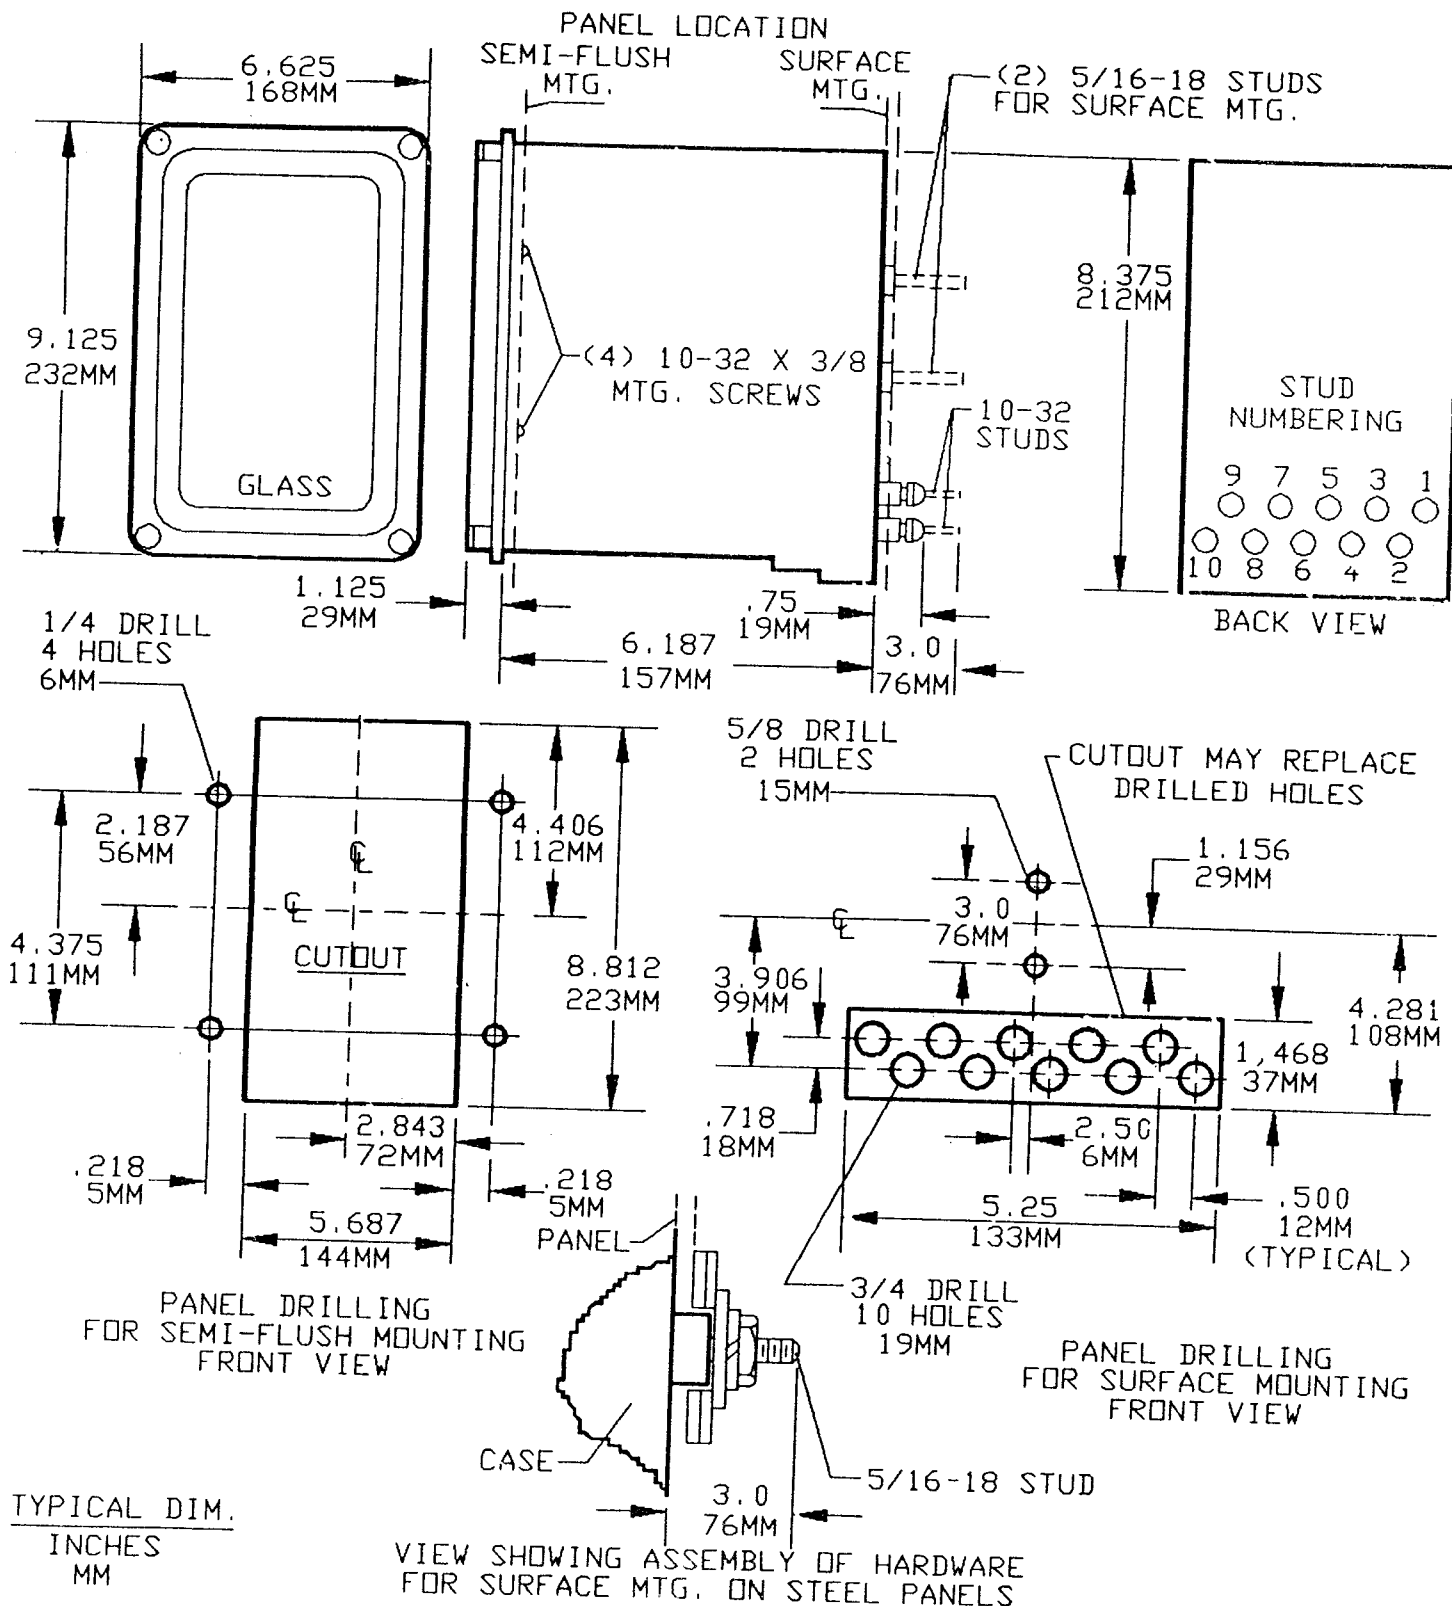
(K-6209271 [8]) Outline and Panel Drilling Dimensions for Type IJS Relay
